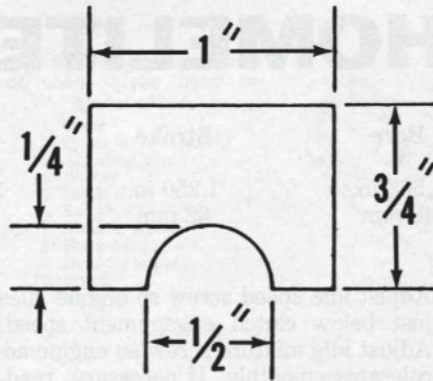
Shims used in crankshaft assembly may be made by putting 0.015 inch thick plastic, metal, or other suitable material in the outline shown above. Refer to Fig. HL305 and text.
